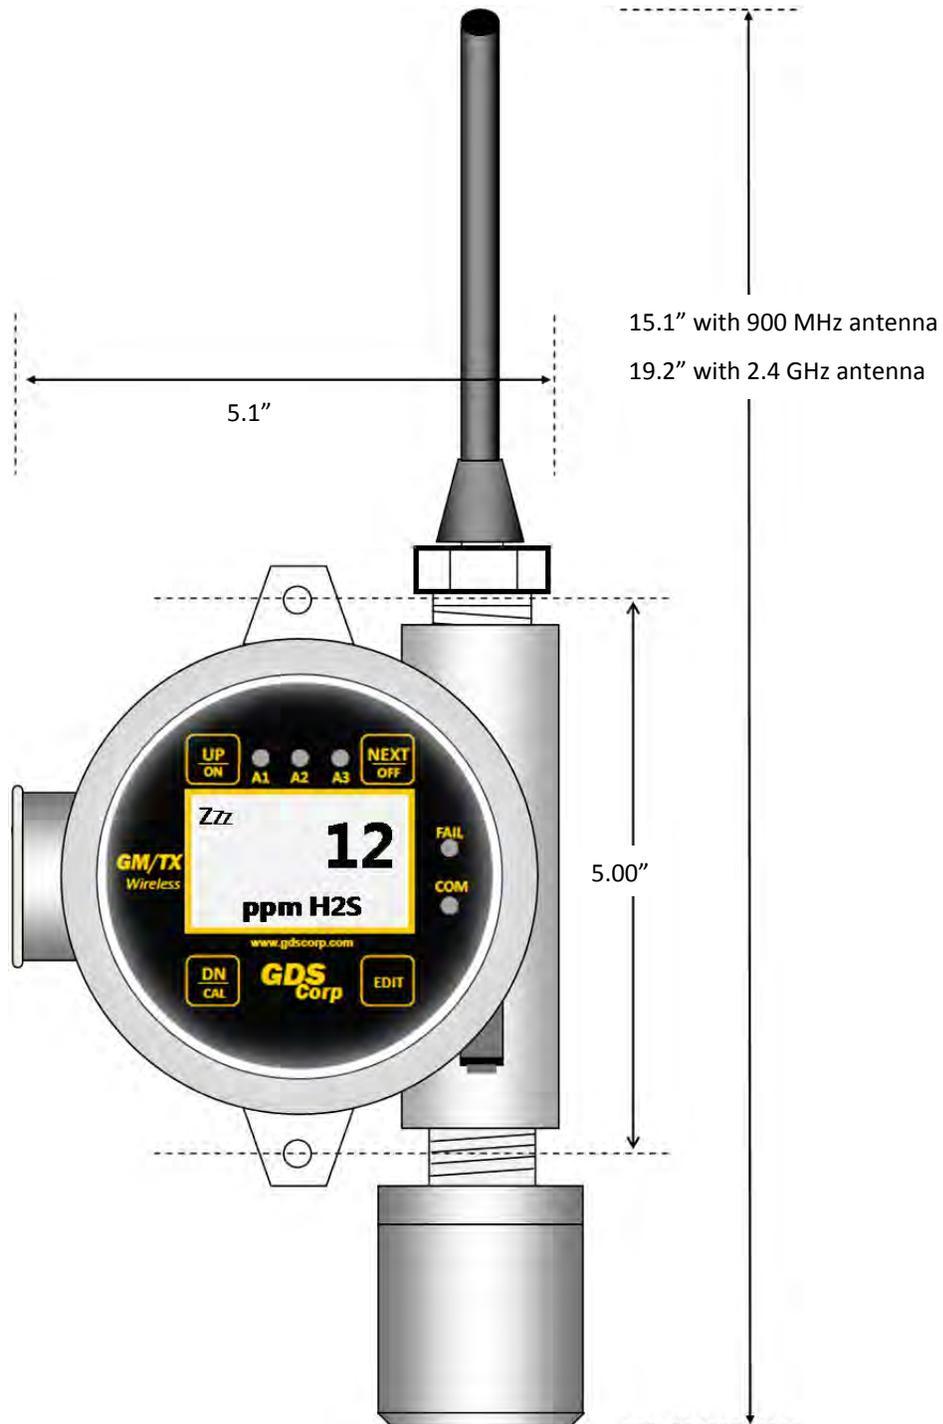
GASMAX TX/DC Dimensions (Single Local Sensor)
